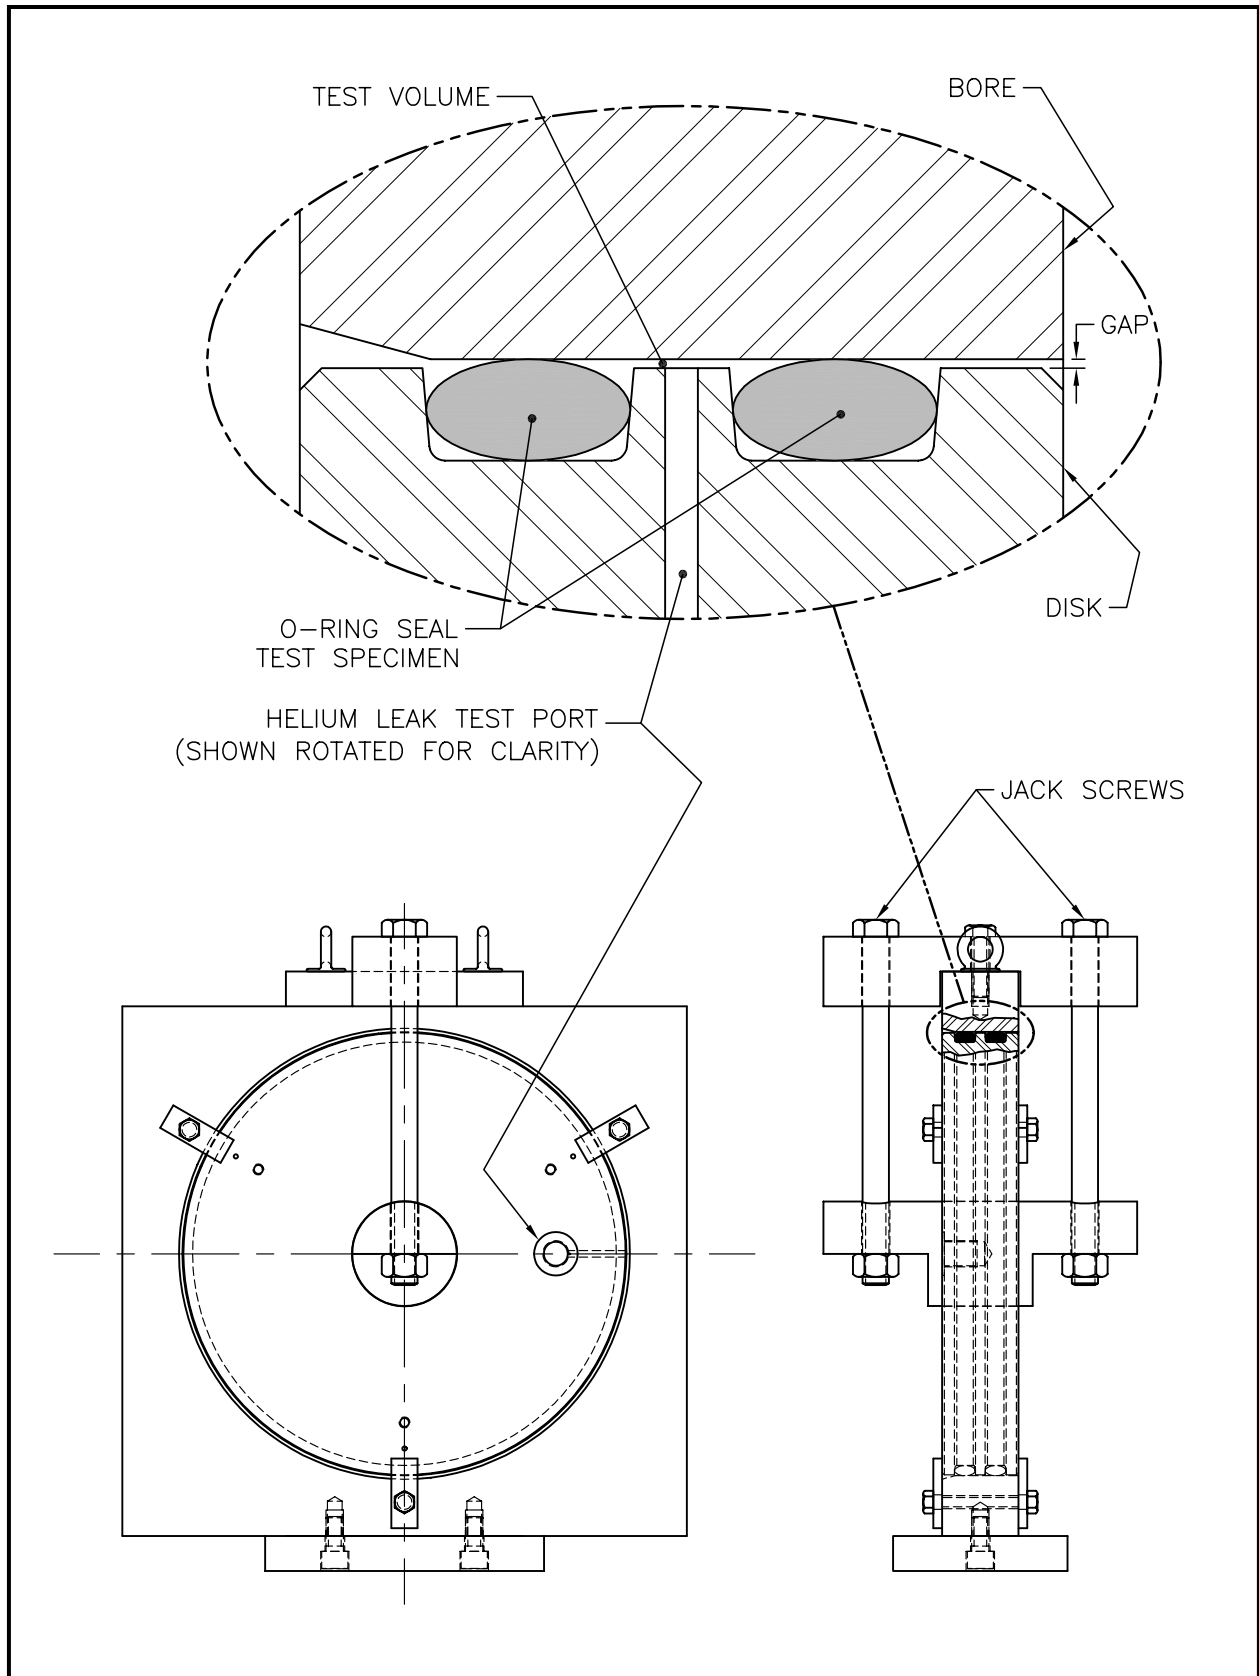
Test Fixture for O-ring Seal Performance Testing
